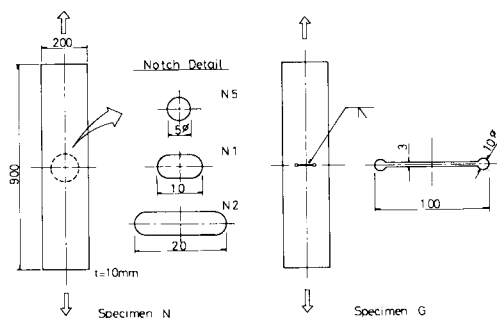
Stop-holed specimen N and groove welded specimen G.
